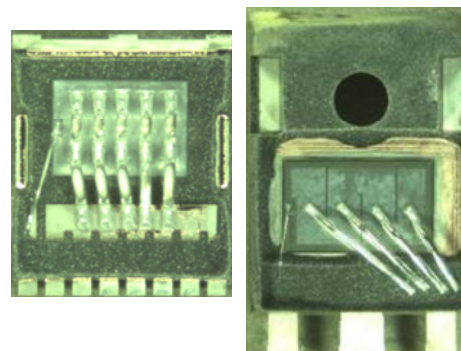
A package with TO-Leadless (TOLL) package (left) compared to a TO-247 package (right).
